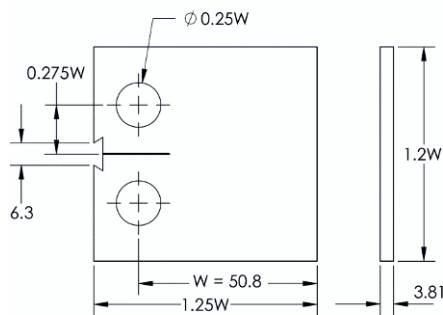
7075-T6 C(T) Coupon (dimensions in mm)
